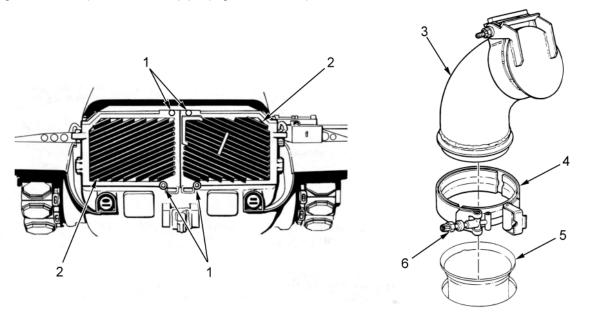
Opening Rear Grille Doors/Removing Exhaust Elbow.
